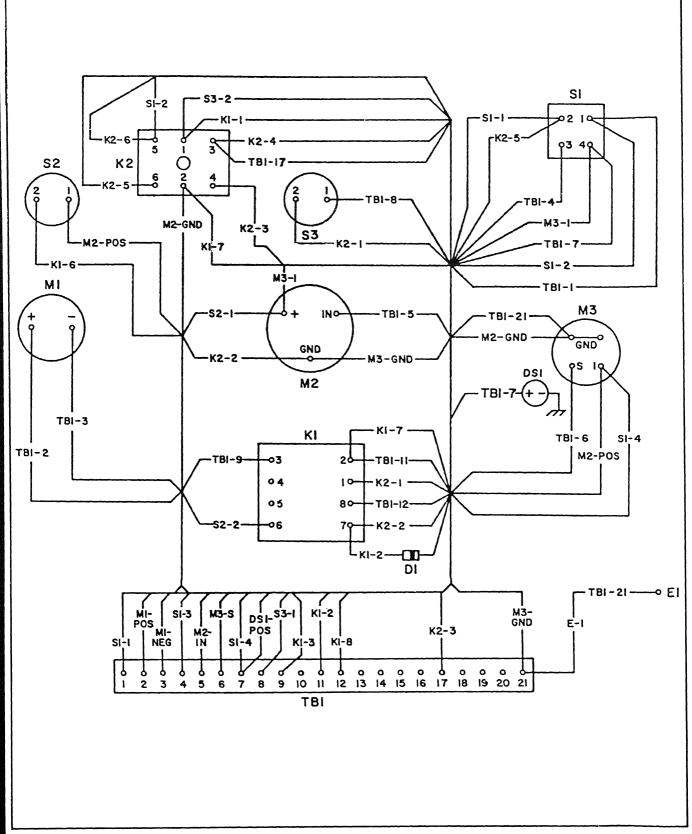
Control Panel Assembly Wiring Diagram (Model LC 350GPM)
